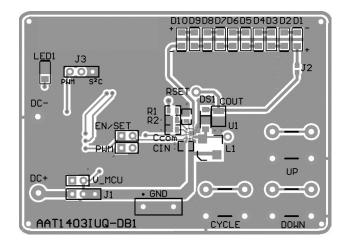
AAT1403 Evaluation Board Top Side Layout.
